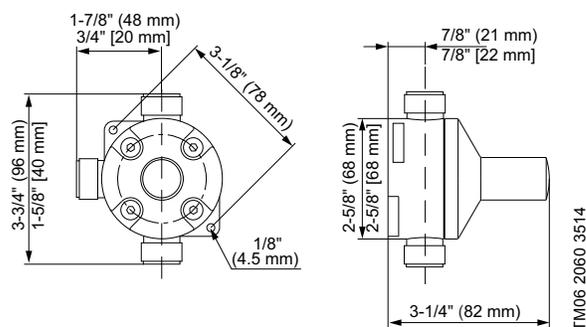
Pressure relief valve. Dimensions in brackets apply to stainless-steel version
